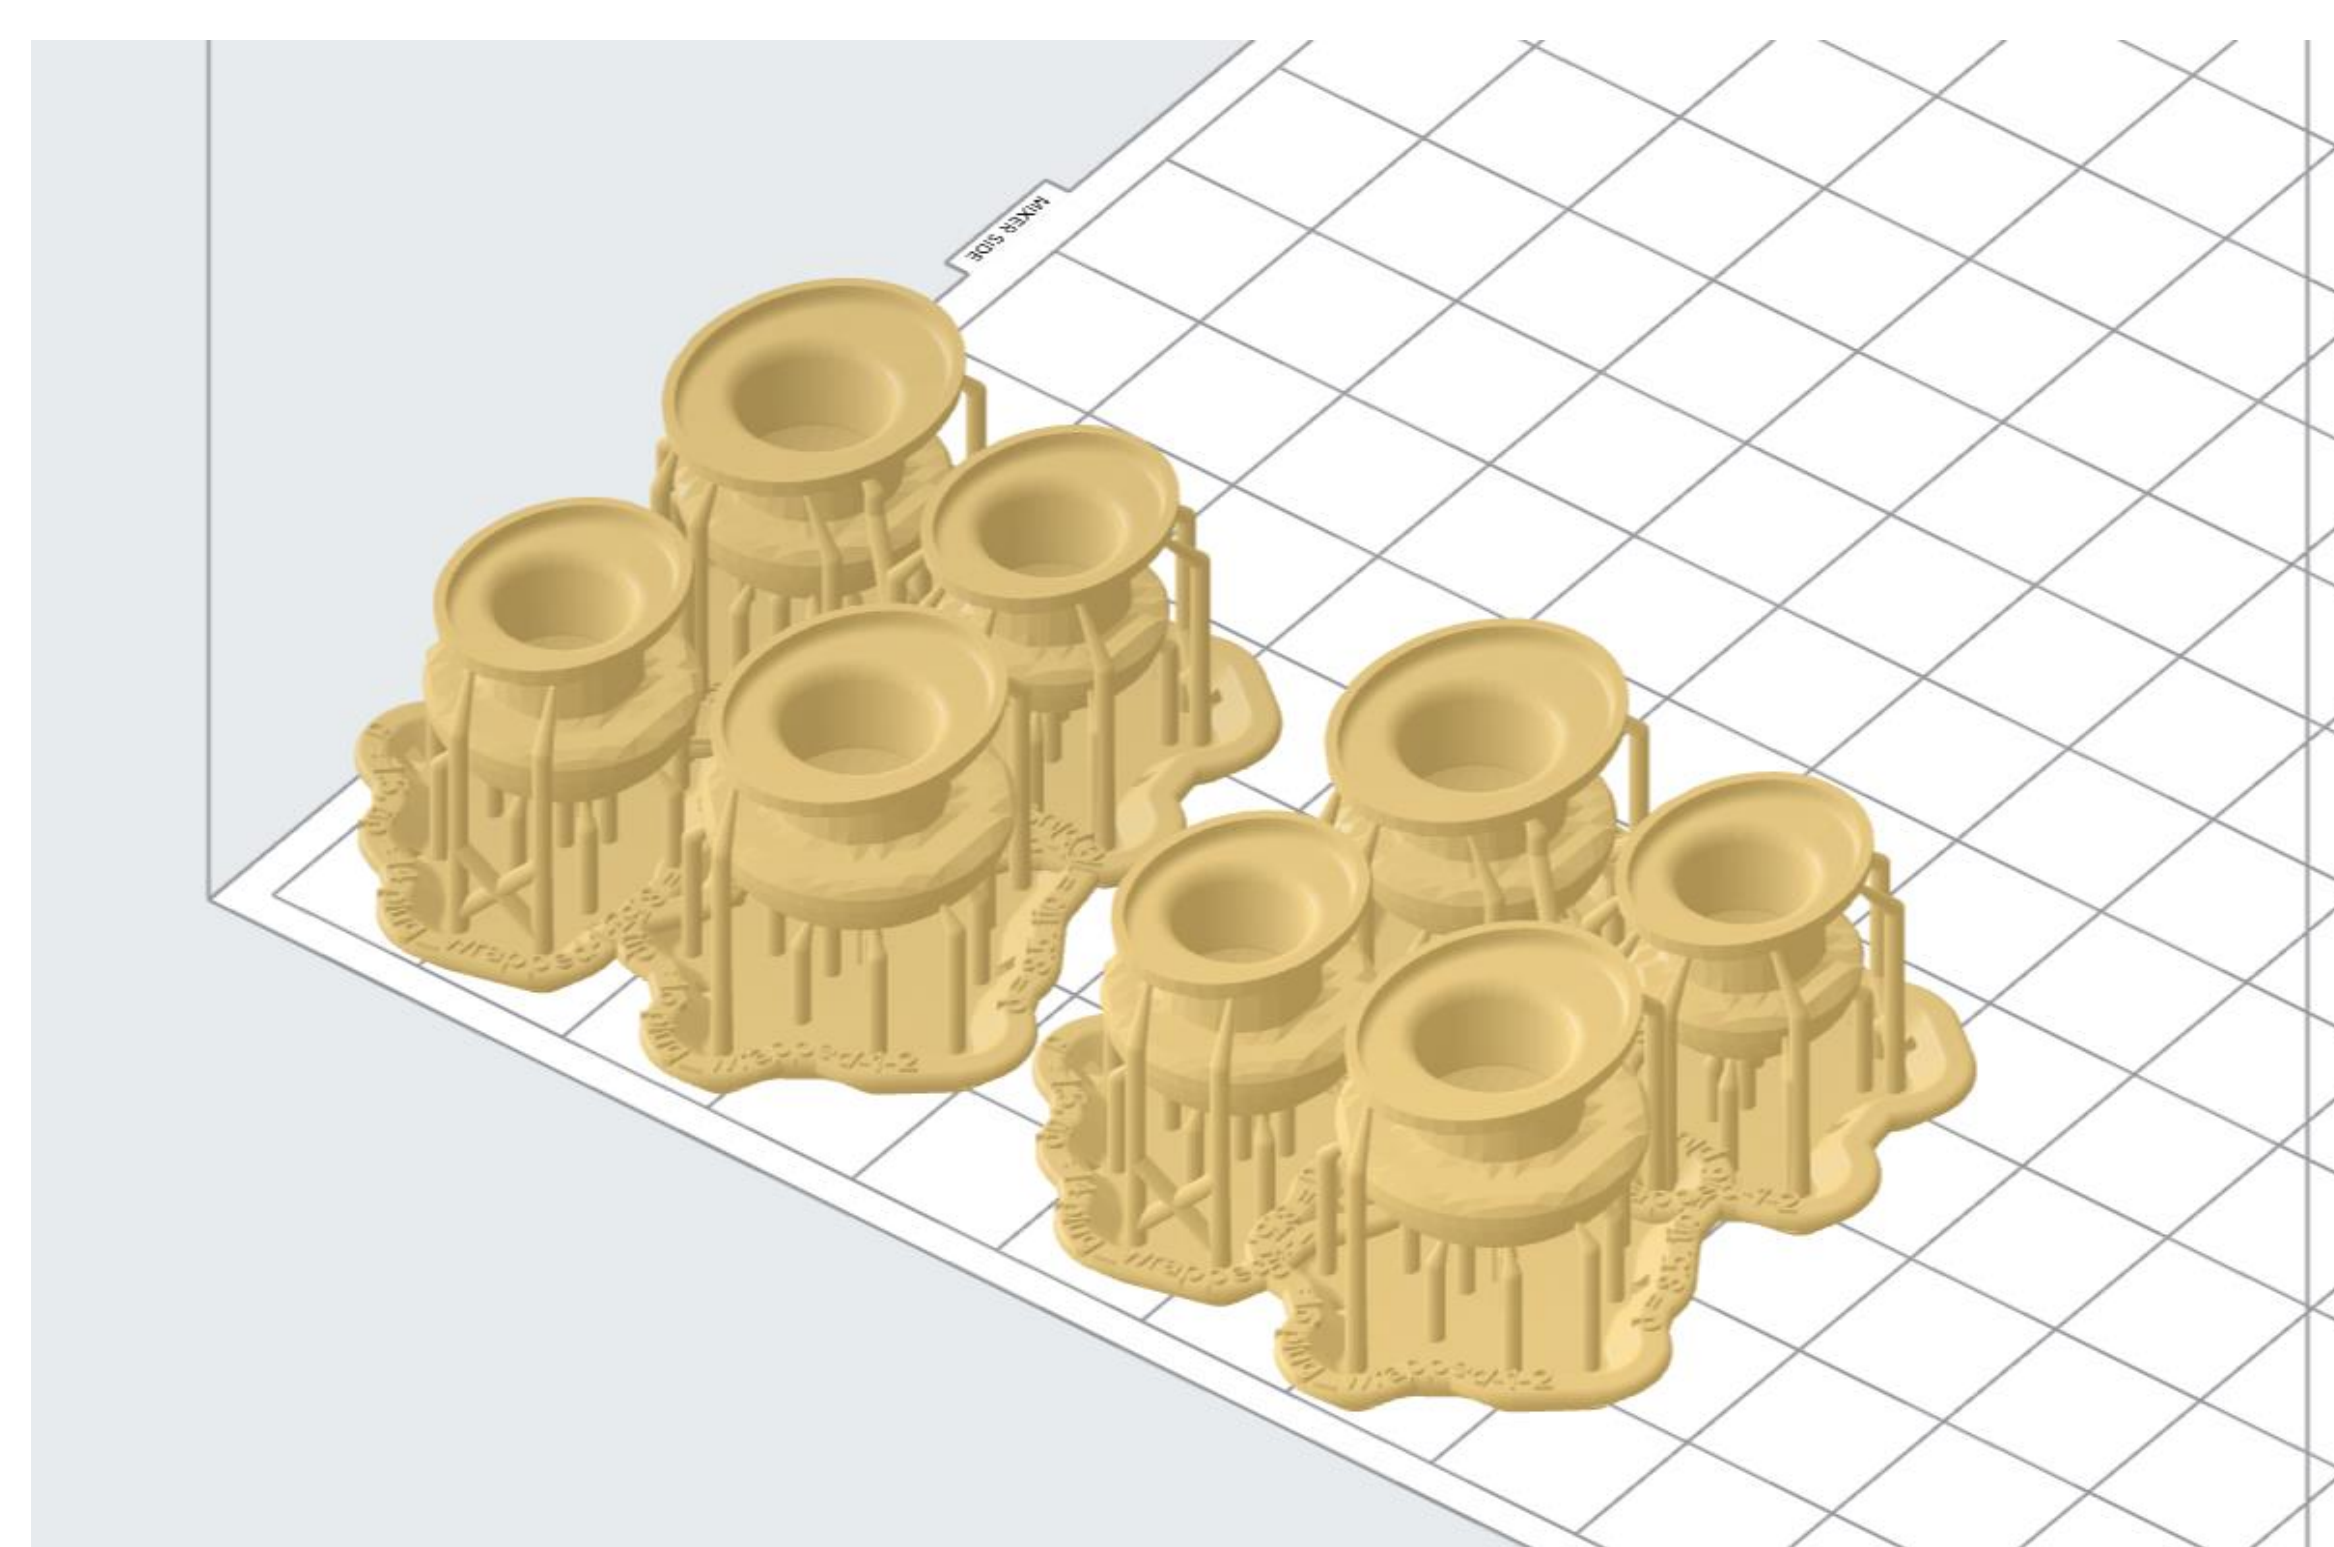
Various sizes of the fistula plug mold on the digital build platform, with supports present, ready for printing
